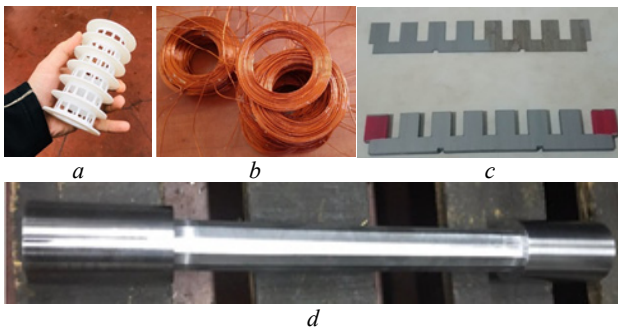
Materials: CNC-produced winding mould (a); windings (b); laser-cut primary laminate (c); CNC-produced magnetless shaft (d)
